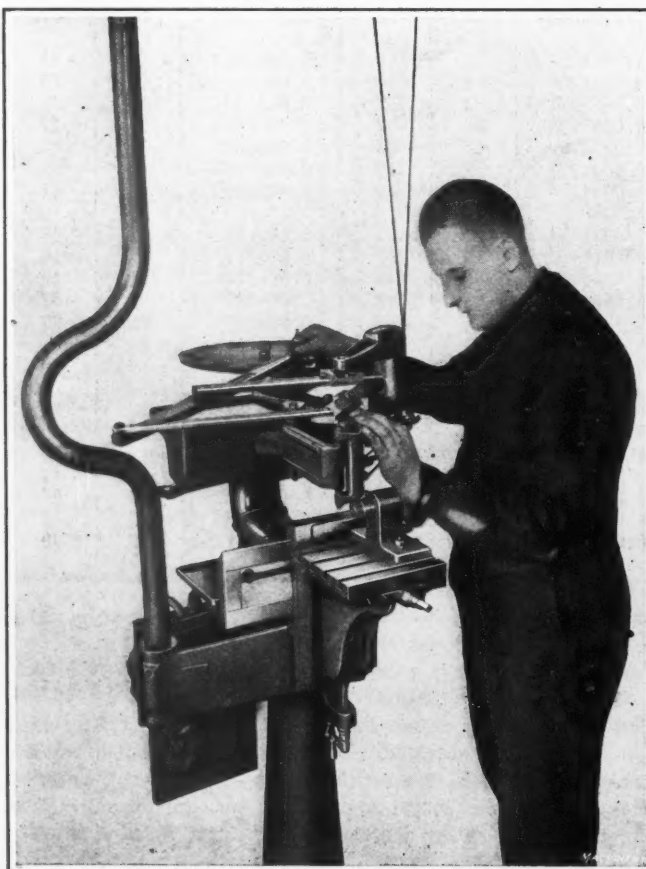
Method of engraving Figures on Cylindrical Work—Illustration shows George Gorton Engraving Machine
